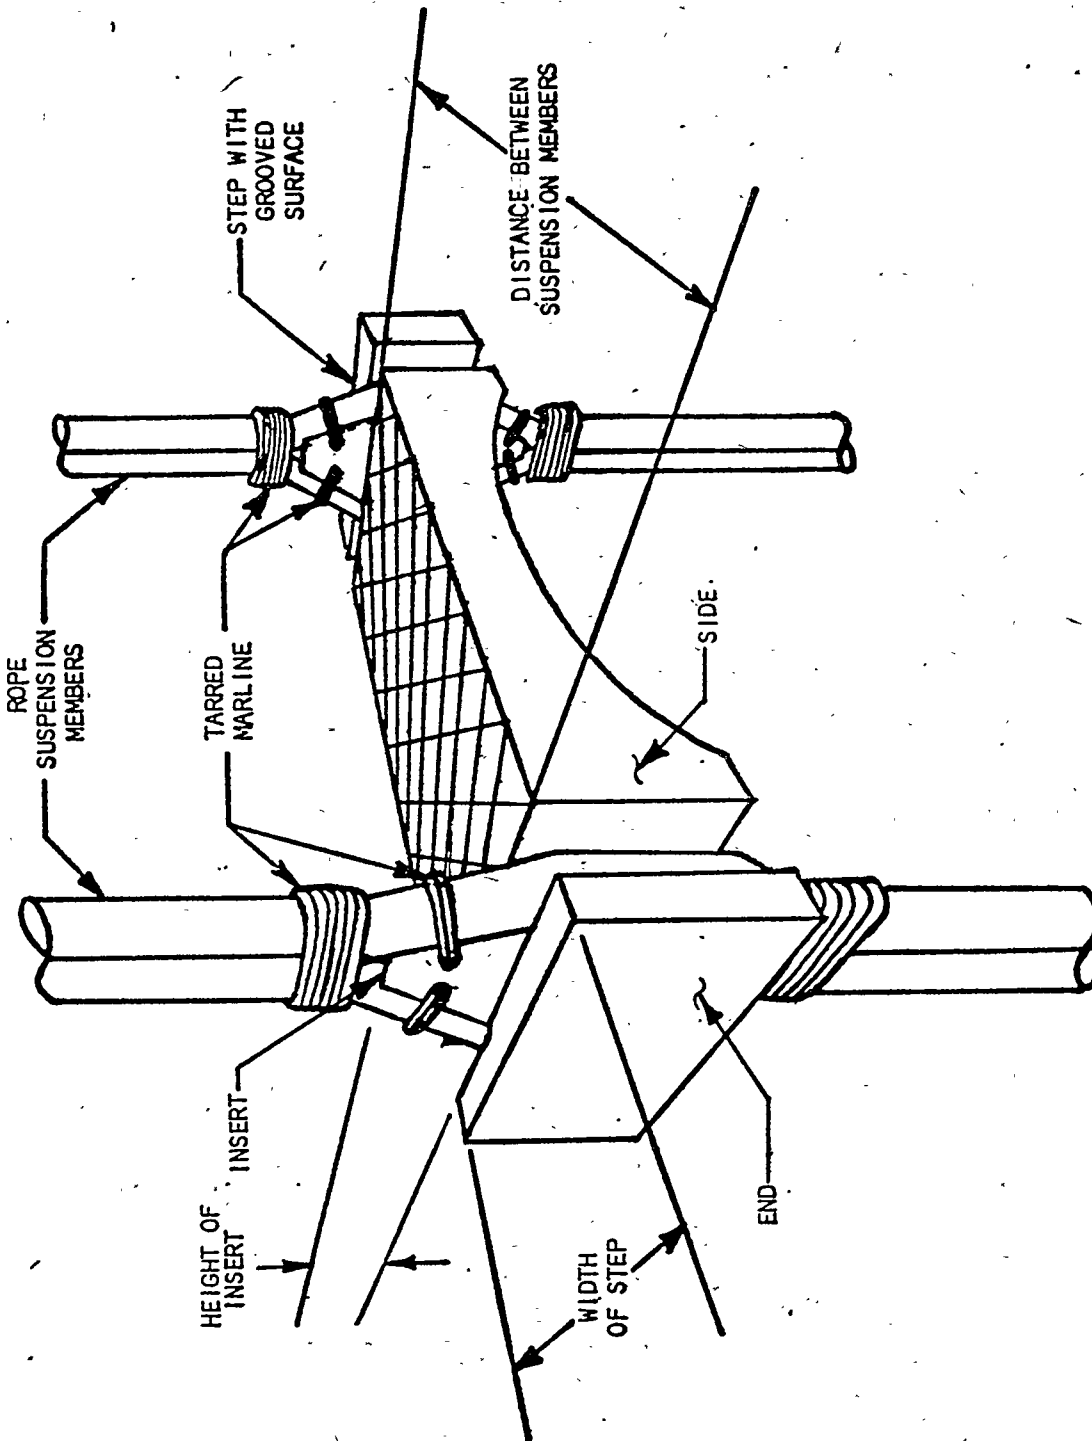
(a) (2). TYPICAL PILOT LADDER STEP DETAIL
